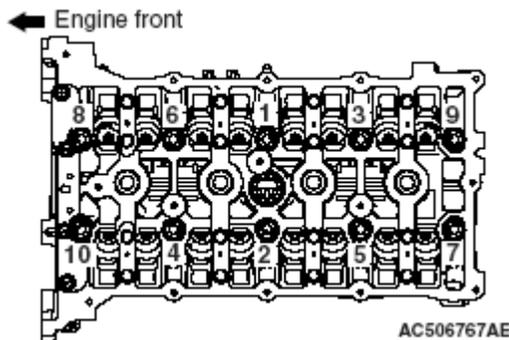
Identifying Cylinder Head Bolt Tighten Sequence
